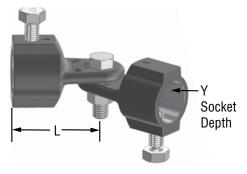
LOADS (LBS) • WEIGHT (LBS) • DIMENSIONS (IN)
